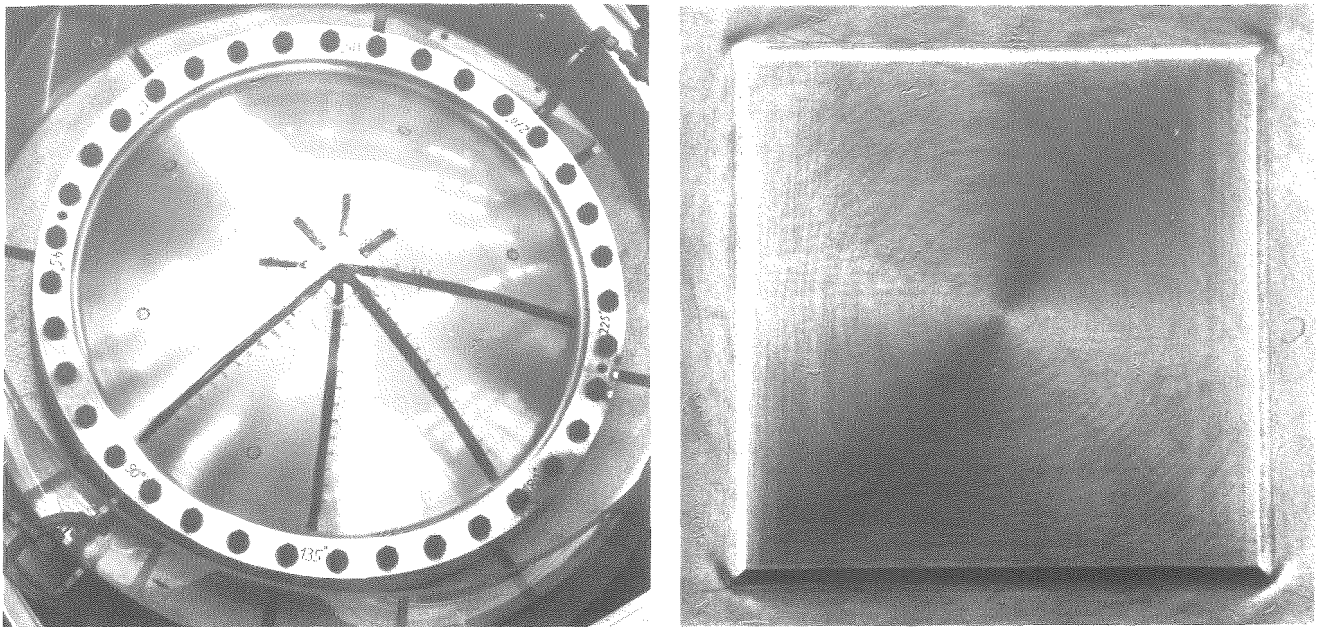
Membrane with a quadrilateral reinforcement after a first crack occurred (near the lower left corner of the reinforcement) at a pressure of 31.2 bar.
